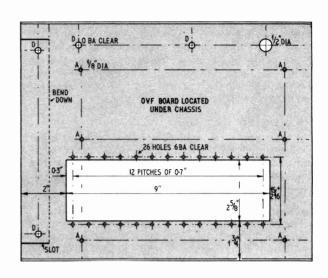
The OVF board is mounted on the underside of the chassis in the four holes marked "A" in the main chassis plate
